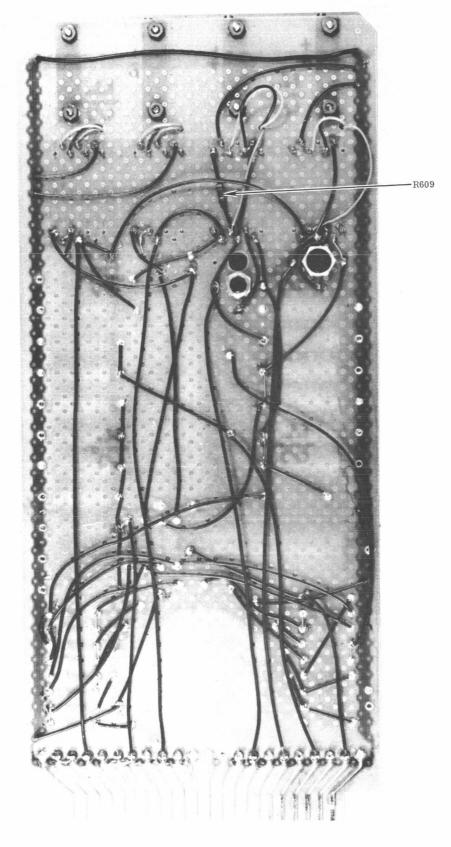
Bottom View Board 6 Low Voltage Power Supply
